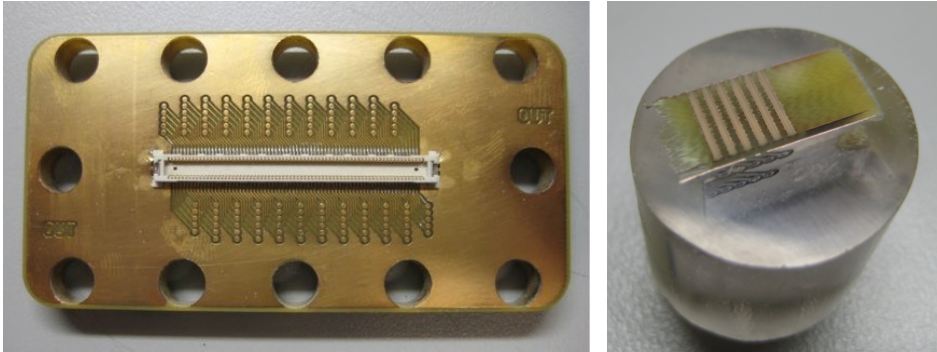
Cross section of the PCB feedthrough stackup.
